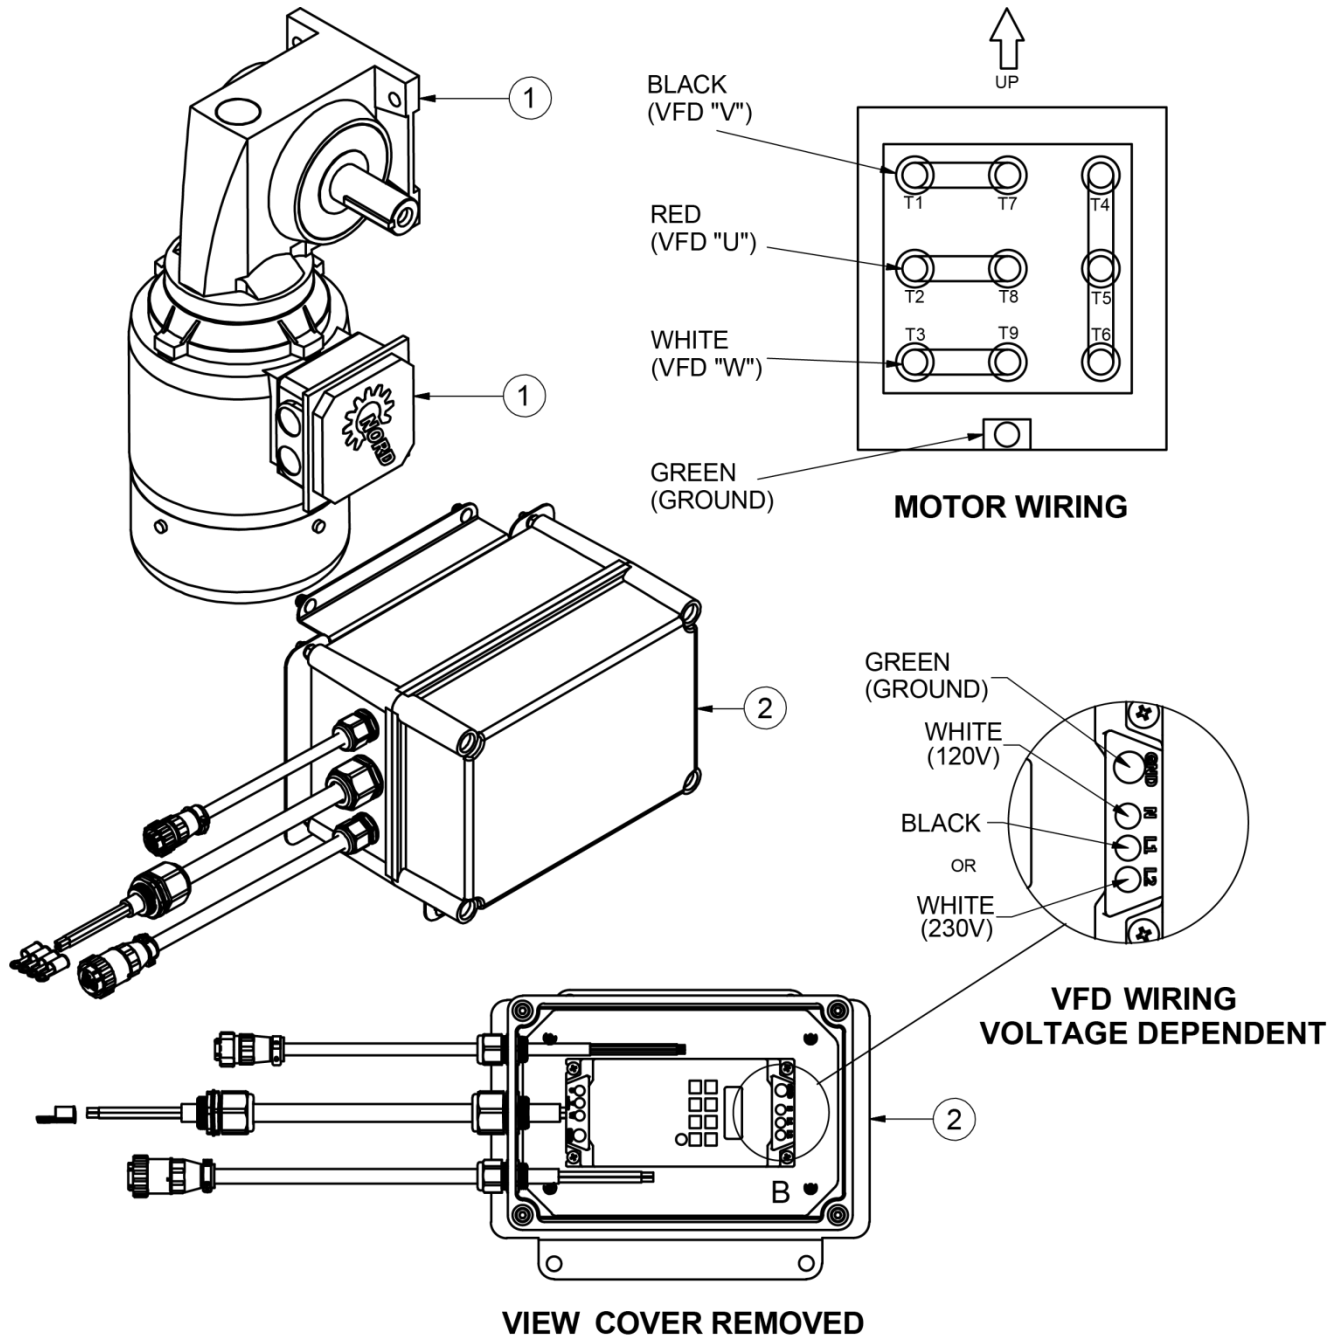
Drive, Motor Wiring, 3-Phase, 230V/460V, 50 Hz/60 Hz
